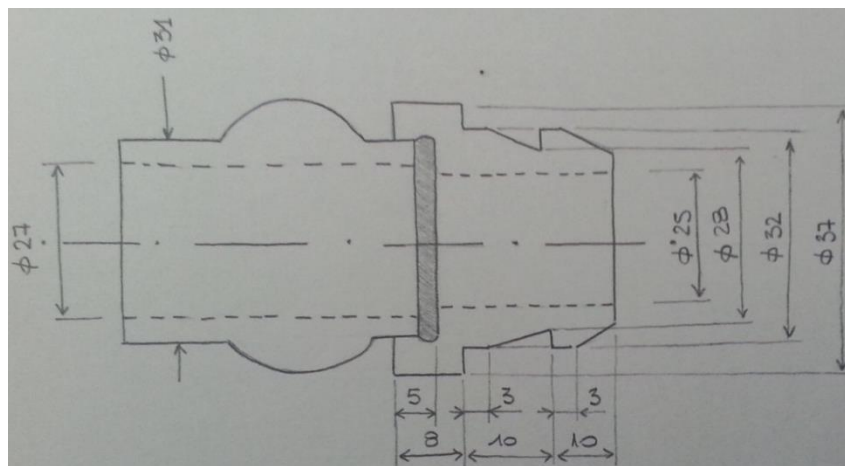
Connector sinus of Valsalva and silicone tube – Hand drawing (A.O.P.)
